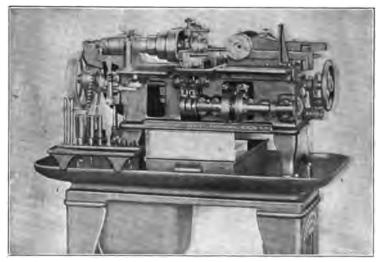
No. 00 Brown & Sharpe Automatic Turret Forming Machine, Front View
